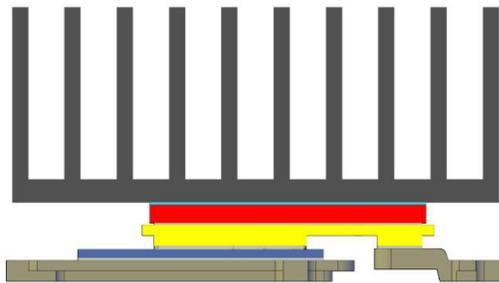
Cross Section of Dual Cool and Heatsink Assembly
